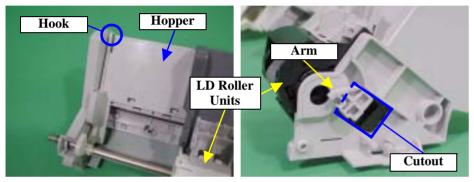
Removing the Hopper, Two Left and Right LD Roller Units, LD Roller Shaft and Left Hopper Cam
